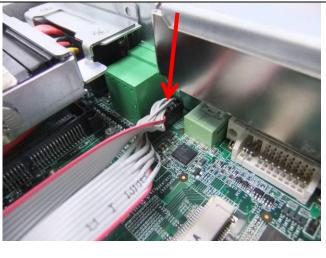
Plug COM 5 & COM 6 cable onto the motherboard.
